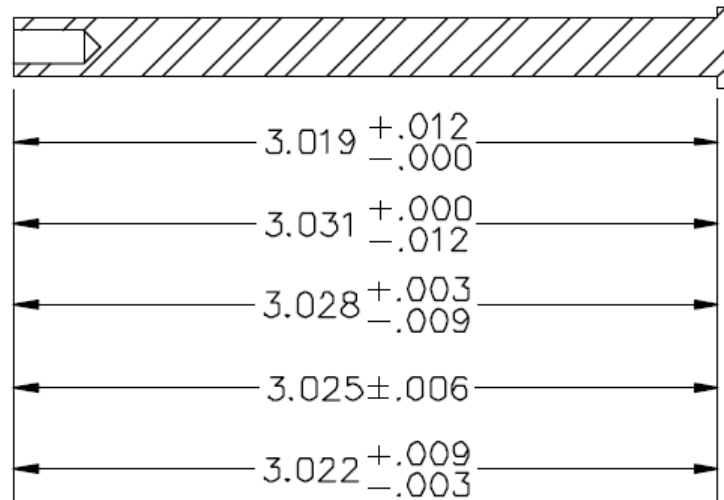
methods to dimension the length of a shaft. (Drake, 1999)
